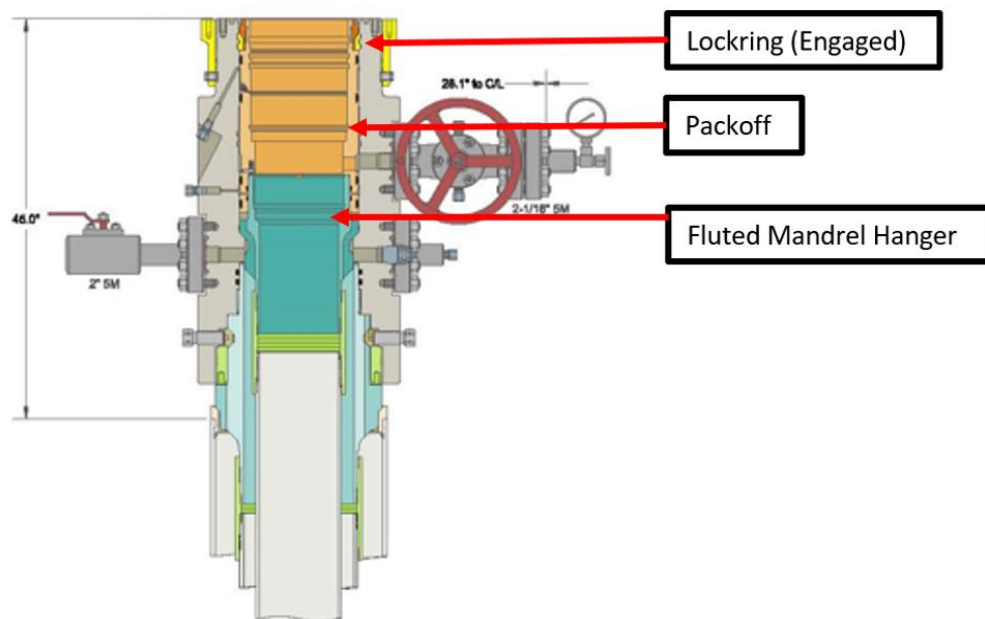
Cactus Offline Cementing Tool Schematic (5M tool)
